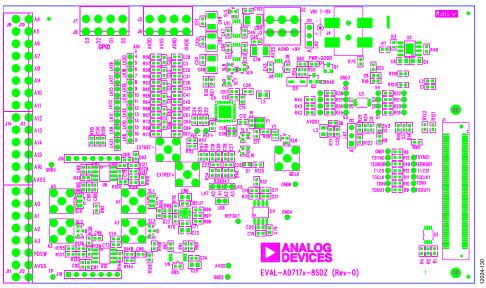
Top Printed Circuit Board (PCB) Silkscreen
